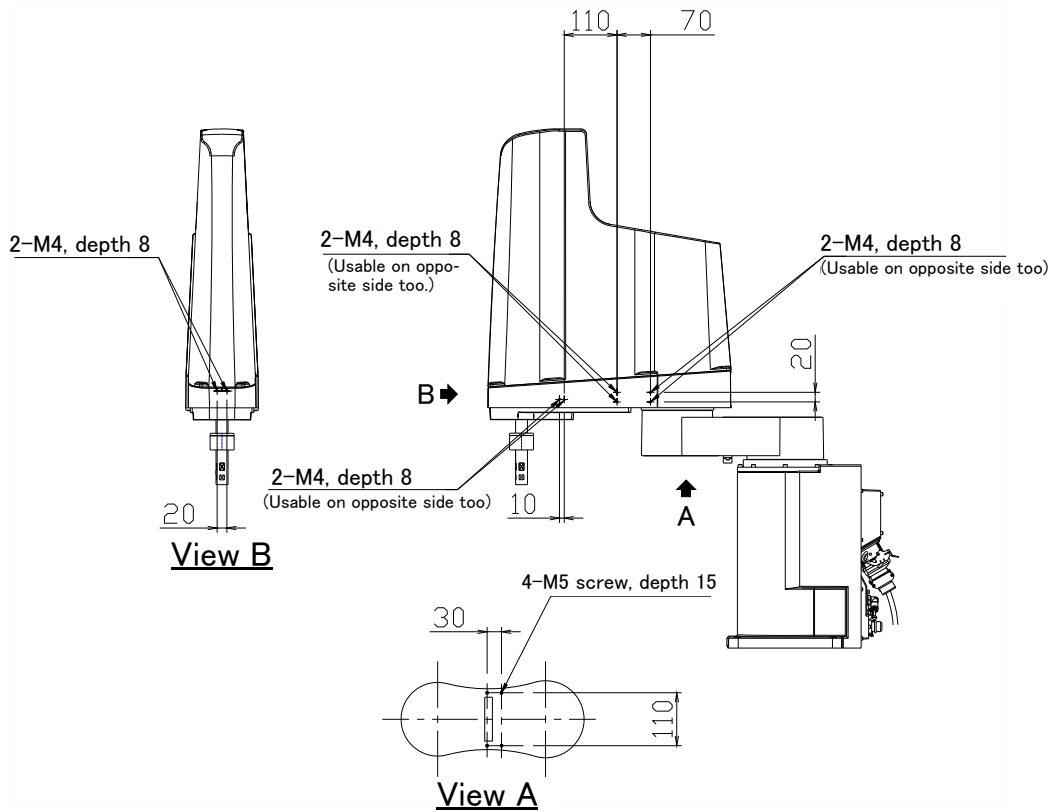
Location of screw holes for fixing wiring/piping (RH-12FH/20FH)
